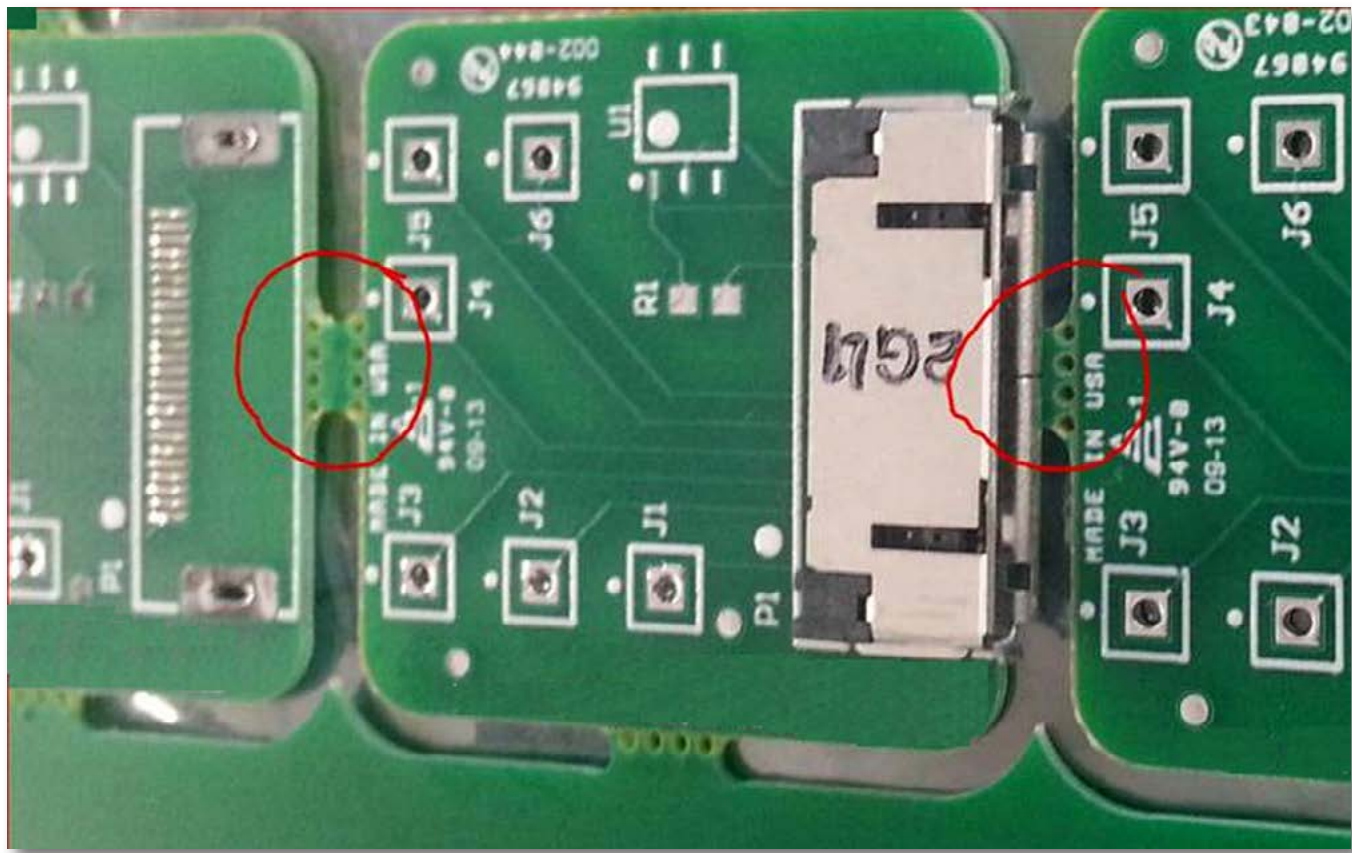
A breakaway tab that remained between these boards after routing interfered with assembling a connector that extends over that edge. Such problems occur when board fabrication and assembly are not closely coordinated.
